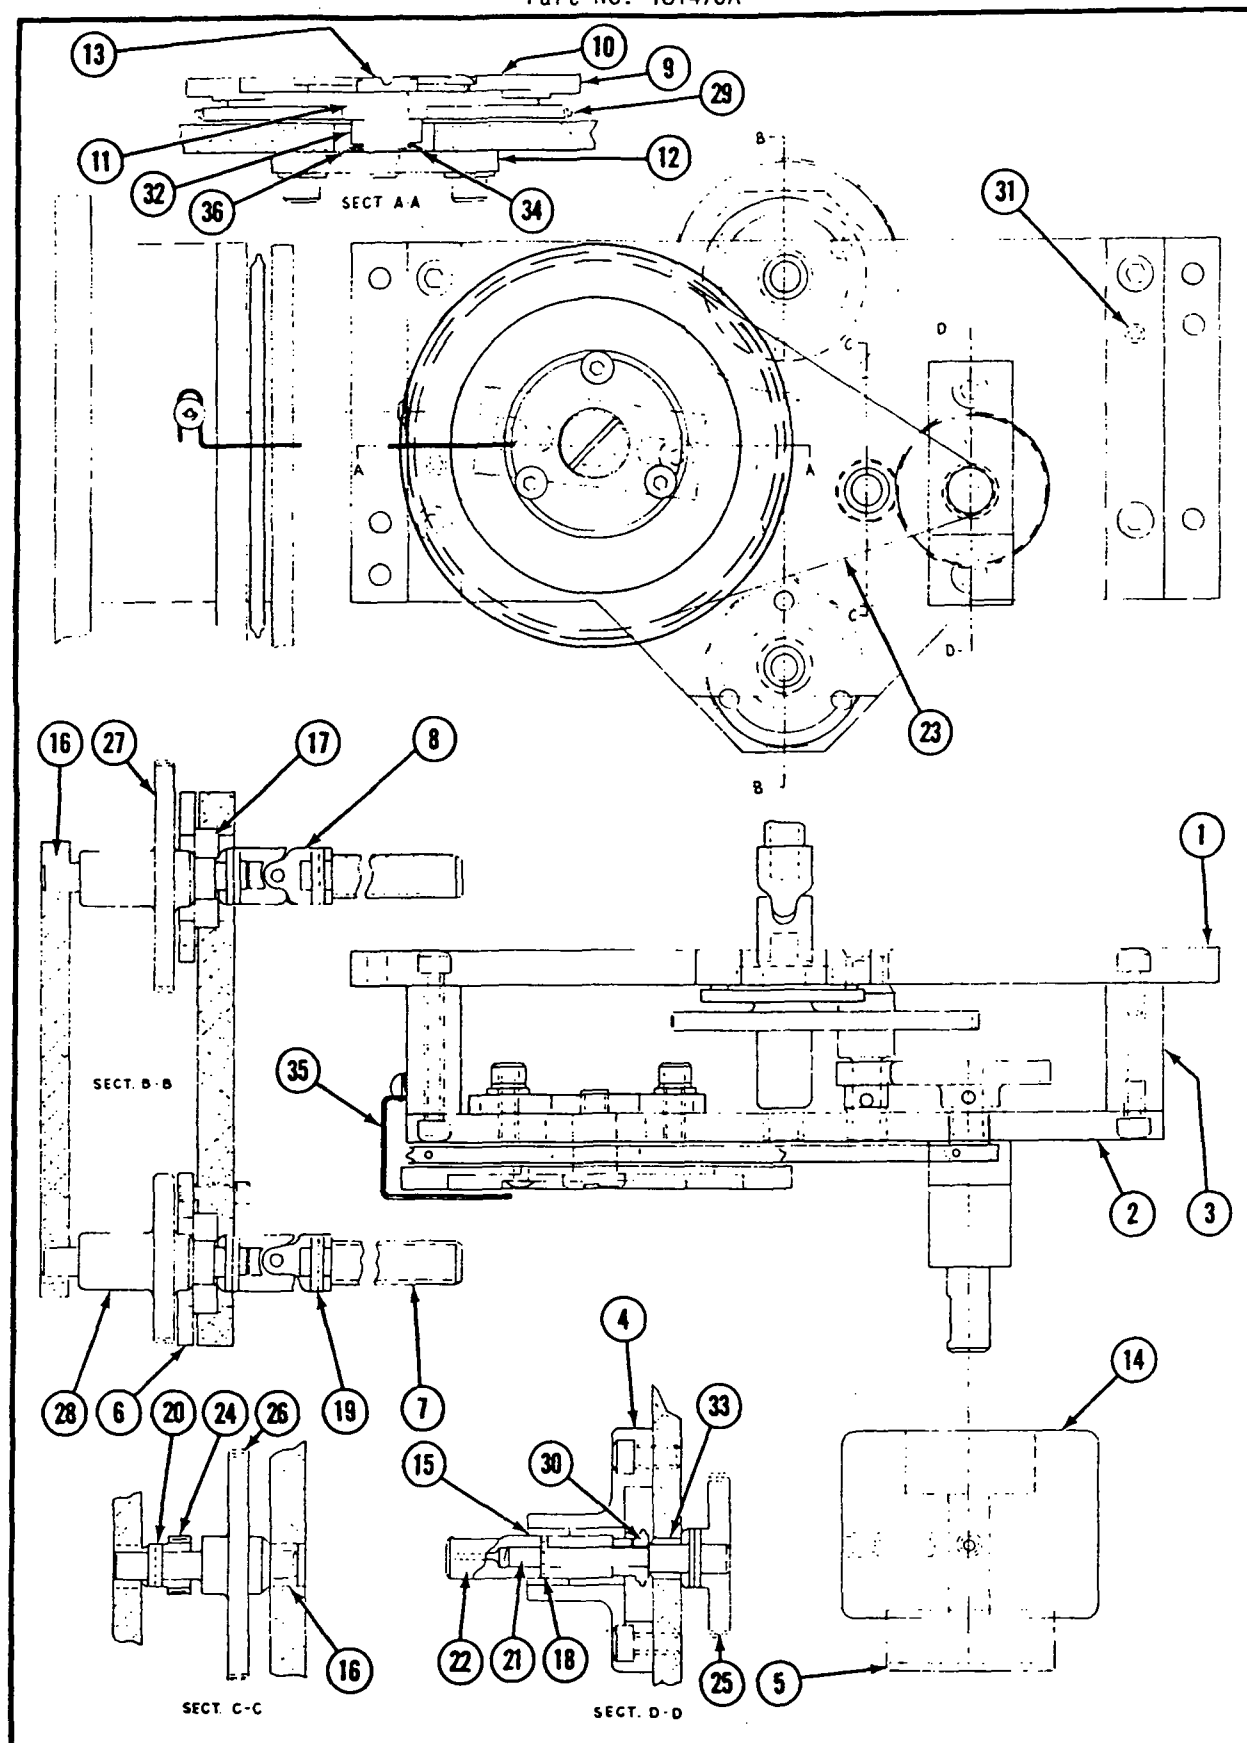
COBALT COLLIMATOR MAIN CROSS HAND GEAR DRIVE ASSEMBLY
